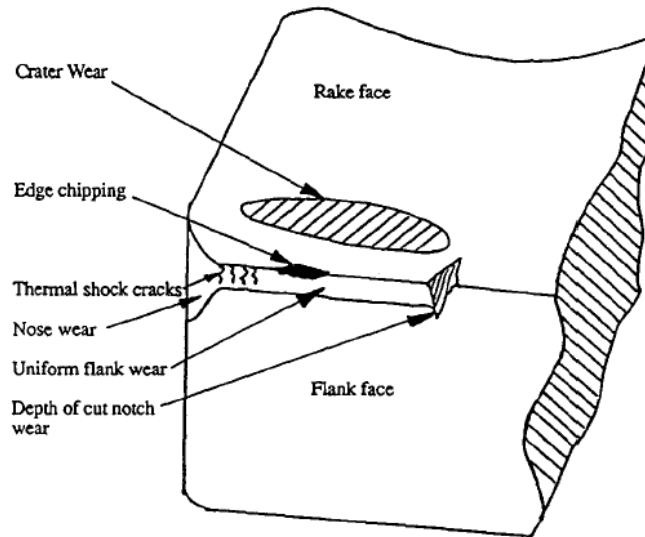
Sketch showing wear, thermal shock cracking and edge chipping for ceramic cutting tools²⁸.
